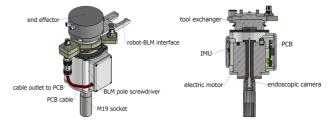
Full assembly (left) and cross-section (right) of the pole screwdriver and lifting tool.
